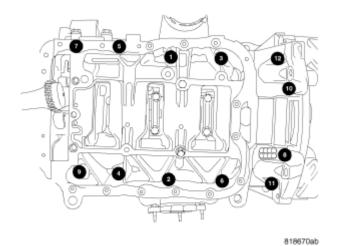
LADDER FRAME TORQUE Courtesy of CHRYSLER LLC
